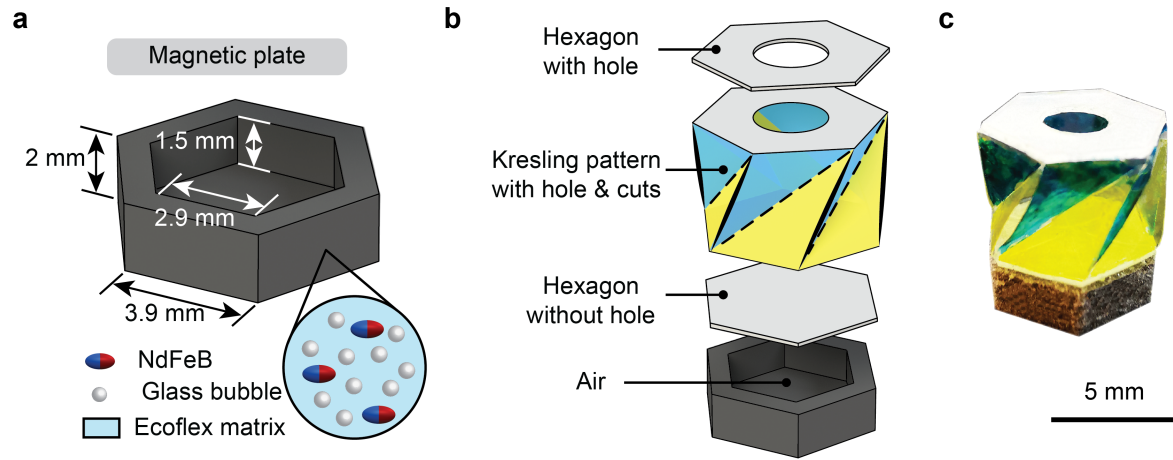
Kresling robot by assembling Kresling pattern and magnetic plate. (a) Geometry and composition of the magnetic plate. (b) Exploded view of the Kresling robot. (c) Photo of the fabricated Kresling robot.
